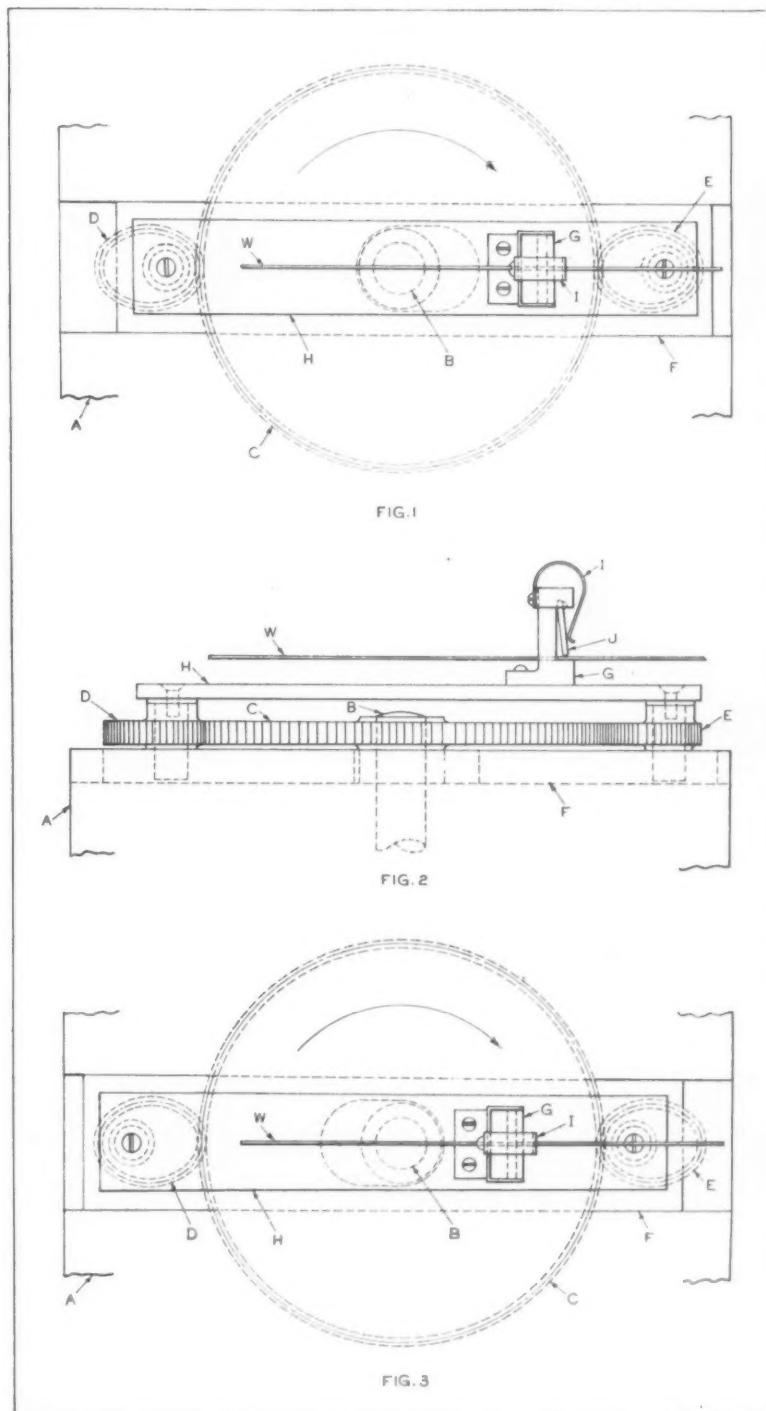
Wire-feeding Mechanism Designed for Rapid, Short-stroke Motion. Fig. 2. End View of Mechanism Shown in Fig. 1, in which Slide *F* is at End of Feeding Movement to Right. Fig. 3. Wire-feeding Mechanism with Slide *F* at End of Return Stroke
